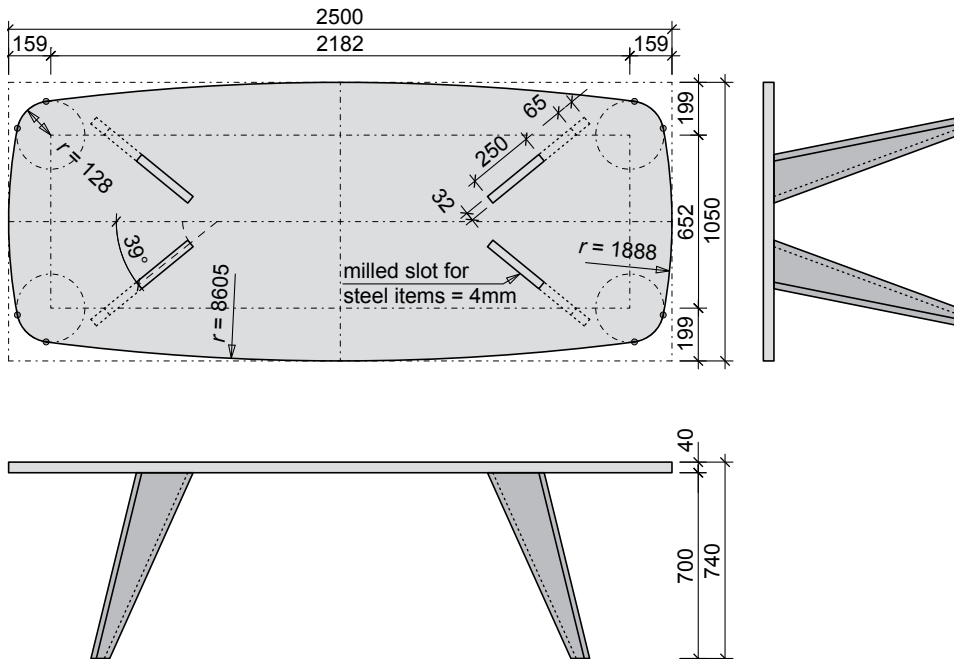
Dimensions of dining table with concrete substructure; [mm]
